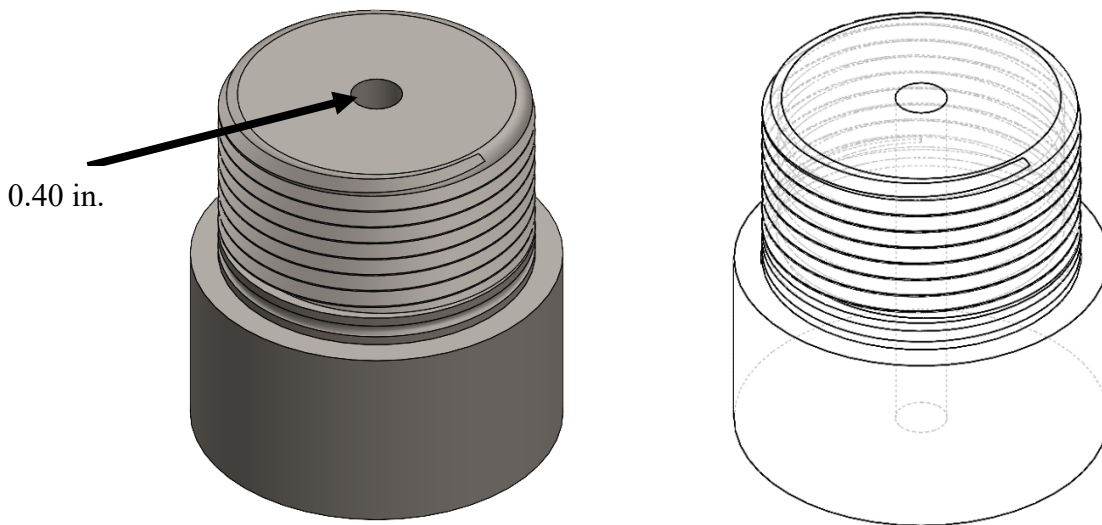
Isometric Views of the Wire Cap for the Laboratory
